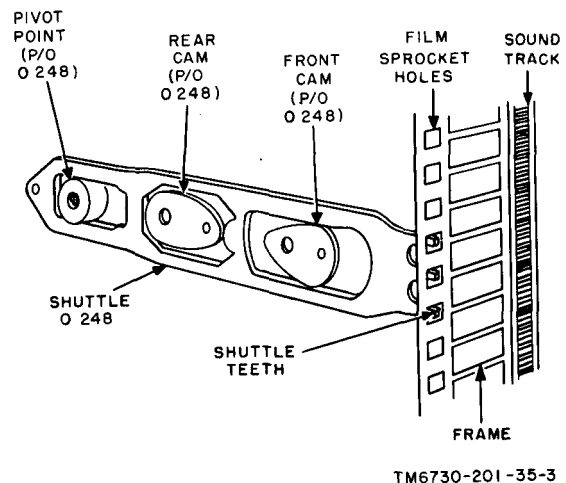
Shuttle teeth engaged in film sprocket holes.
